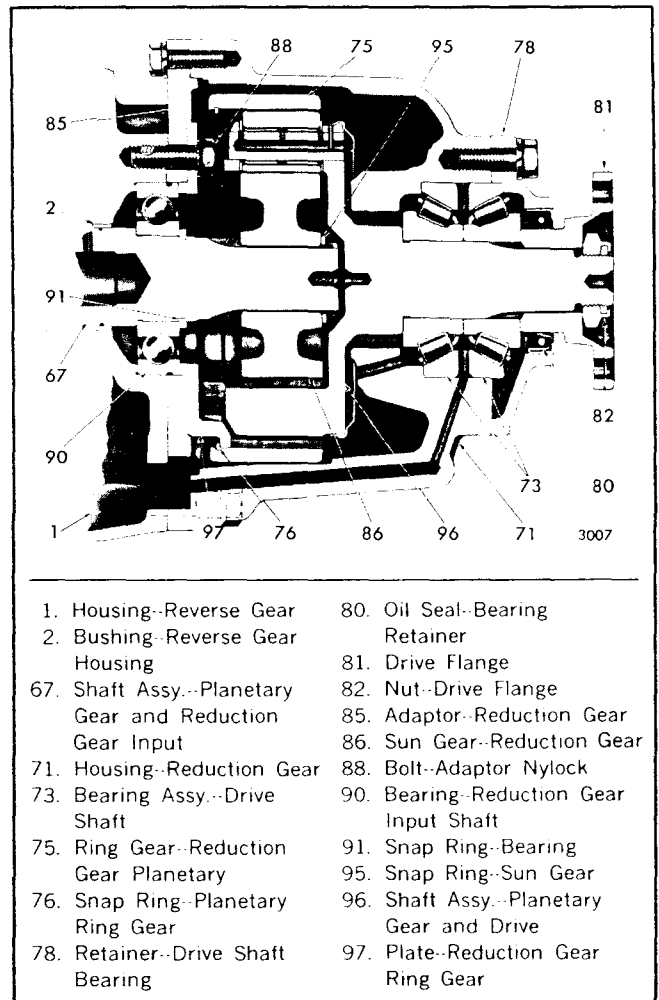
Reduction Gear Assembly (2.5:1 Ratio)
